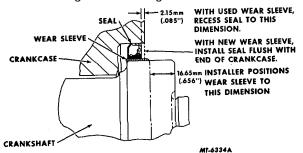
Sectional View Showing Proper Location of Wear Sleeve and Rear Oil Seal
